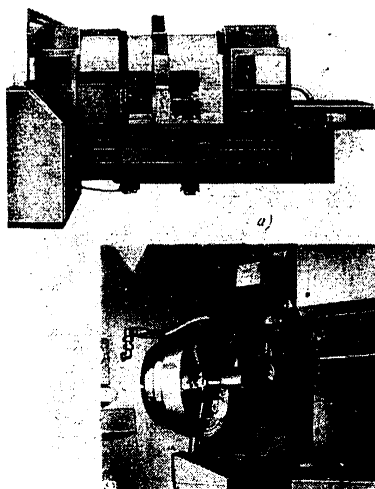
Model PN lathe with ChPU (a) and measurement system in working zone of machine (b).
